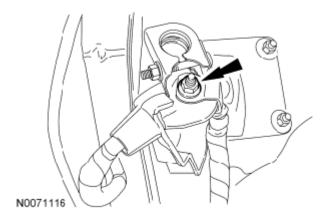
Locating Positive Battery Cable Nut Courtesy of FORD MOTOR CO.
